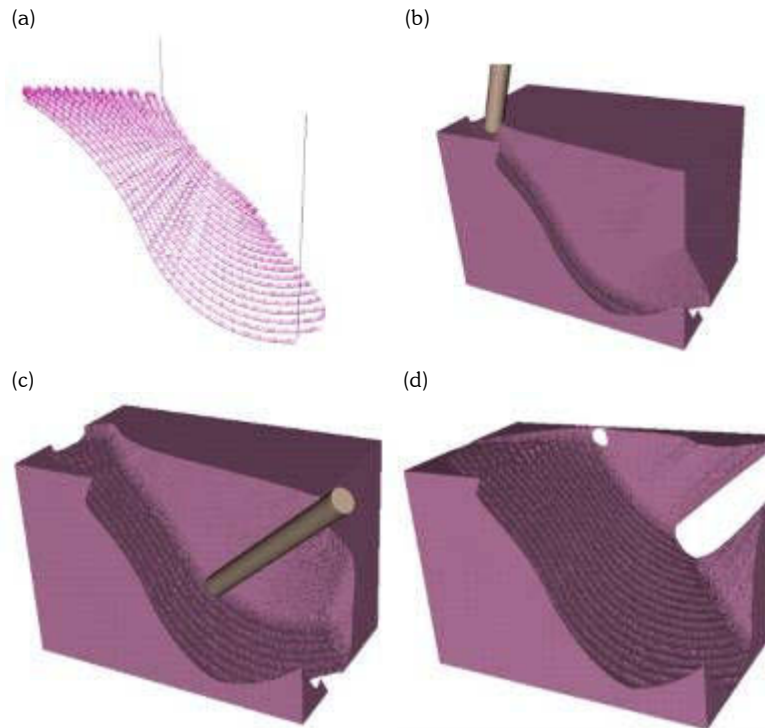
Example of blade in five-axis simulation. (a) Tool paths. (b)(c) In-process workpiece with a cutter. (d) Finished part.
